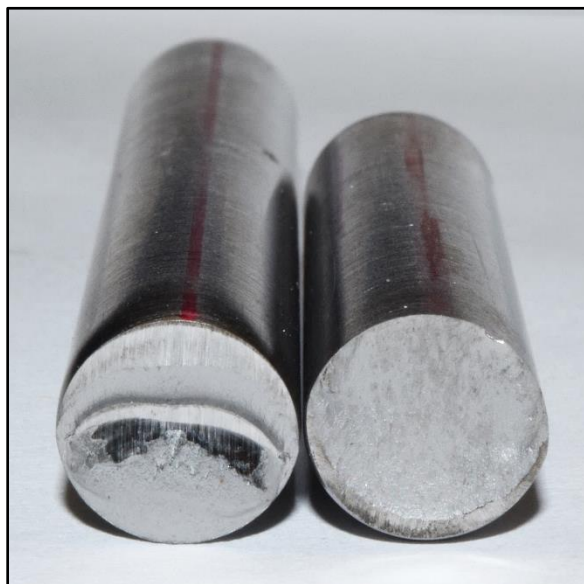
Dual-Point Shear Specimen: Macro View of Failure Surface
